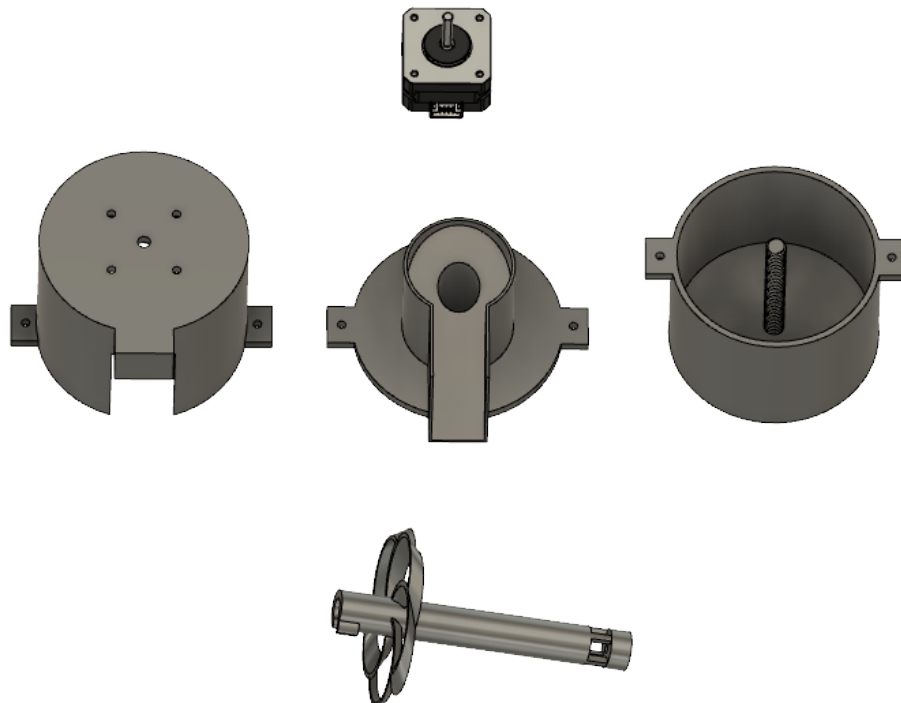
Models of the 5 main components of the prototype dispenser body. From top to bottom and left to right these components are: the drive stepper motor, the cover with motor mounting points, the feed slope and spray catcher, the tank housing with static feed screw, and the rotary pump housing with the attached toroidal agitator.
